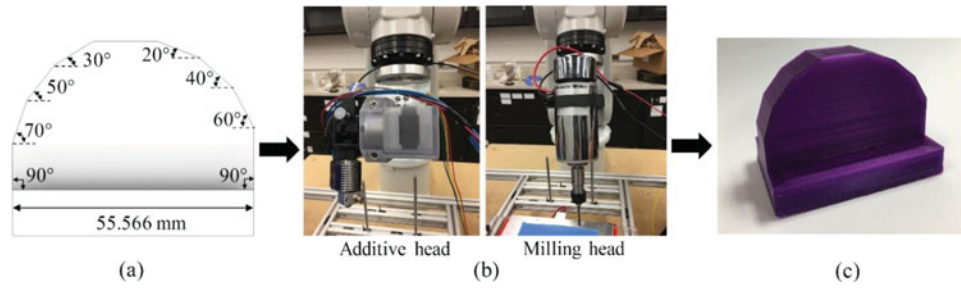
(a) Geometry design, (b) developed hybrid process, and (c) printed part.
